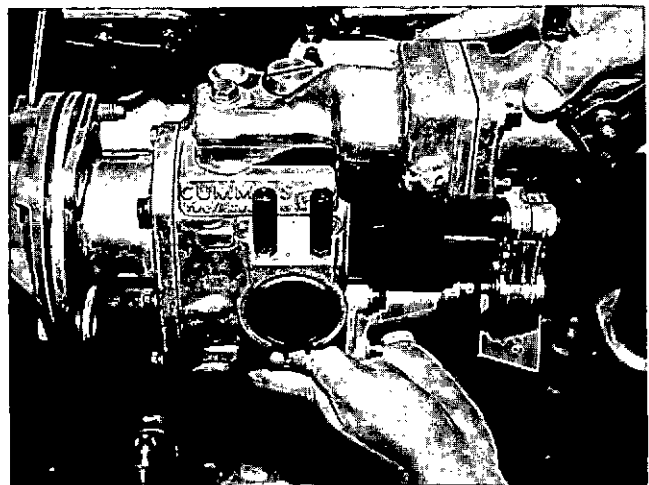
, V414196. Installing flange mounted fuel pump
